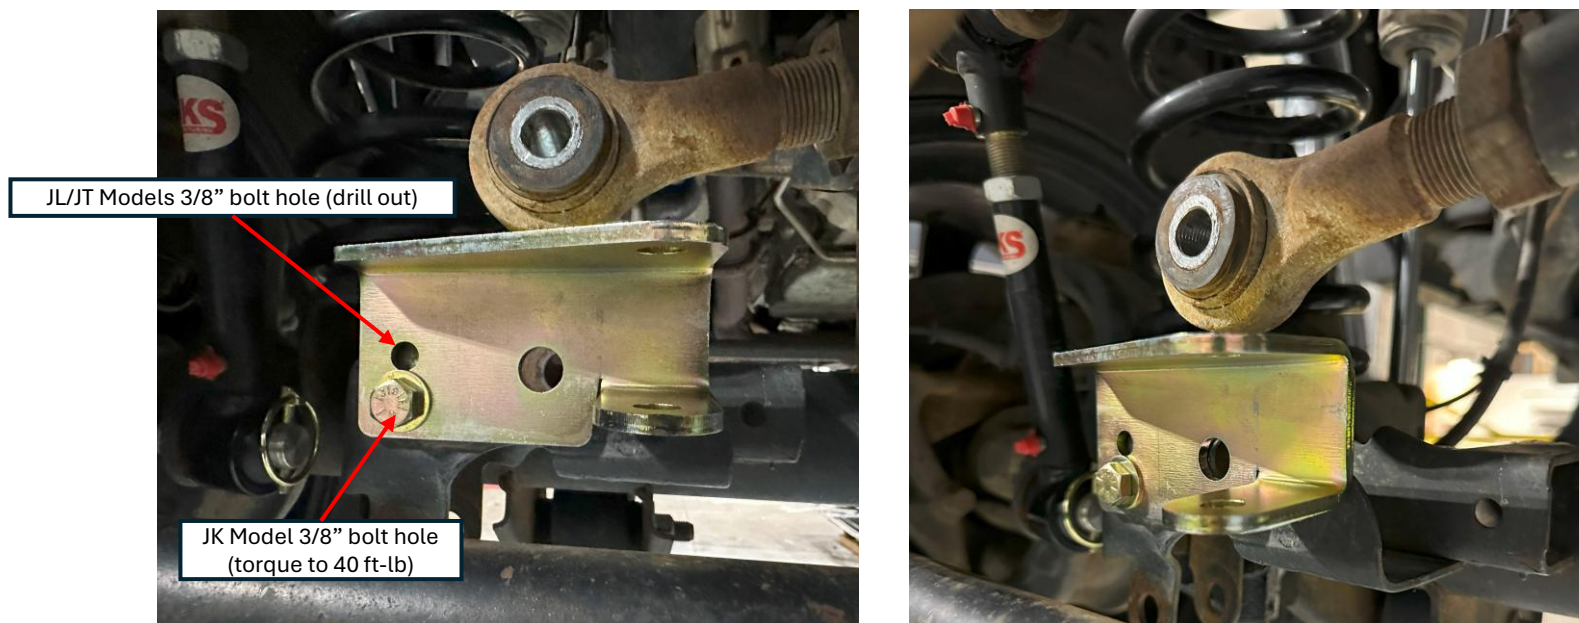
3/8" bolt with washer, lock washer, and nut installed, with track bar bolt hole aligned
